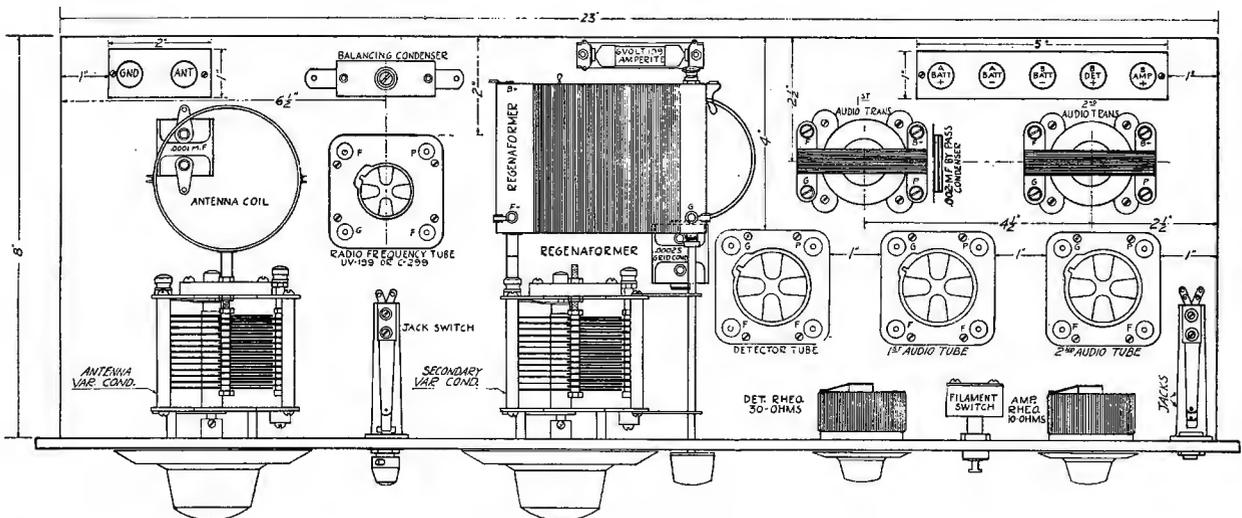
Top view showing arrangement of all parts. Refer to dimensions when mounting apparatus on baseboard
